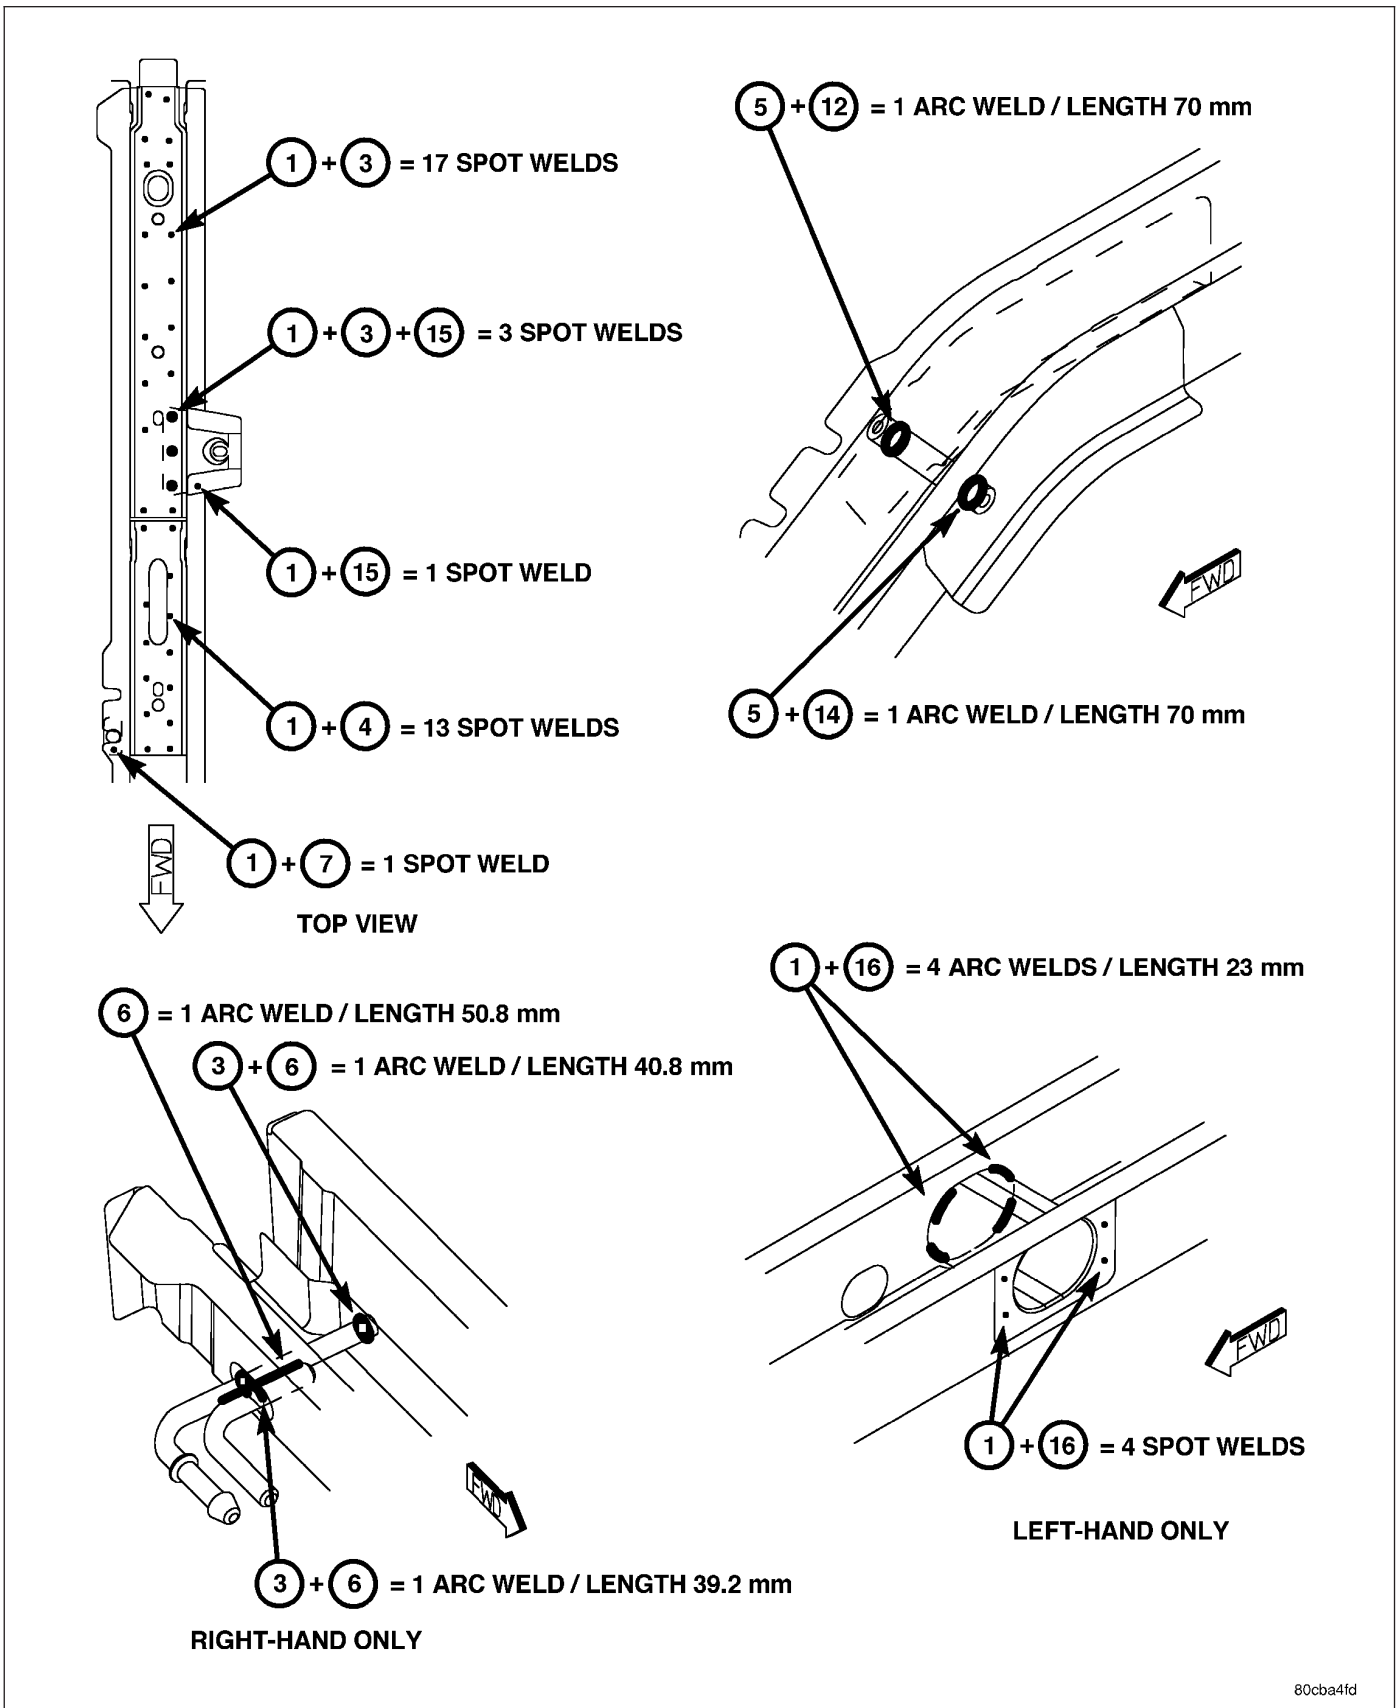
REAR SPRING, SHOCK, FUEL PASS AND EXHAUST BRACKETS
